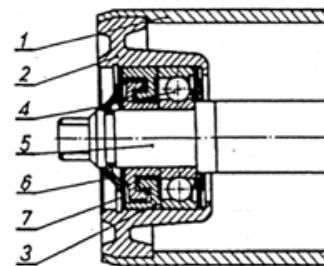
Construction of C-type roller: 1 – shell, 2 – cast iron hub, 3 – labyrinth seal, 4 – bearing, 5 – axle, 6 – sealing blade, 7 – sealing elastic.
